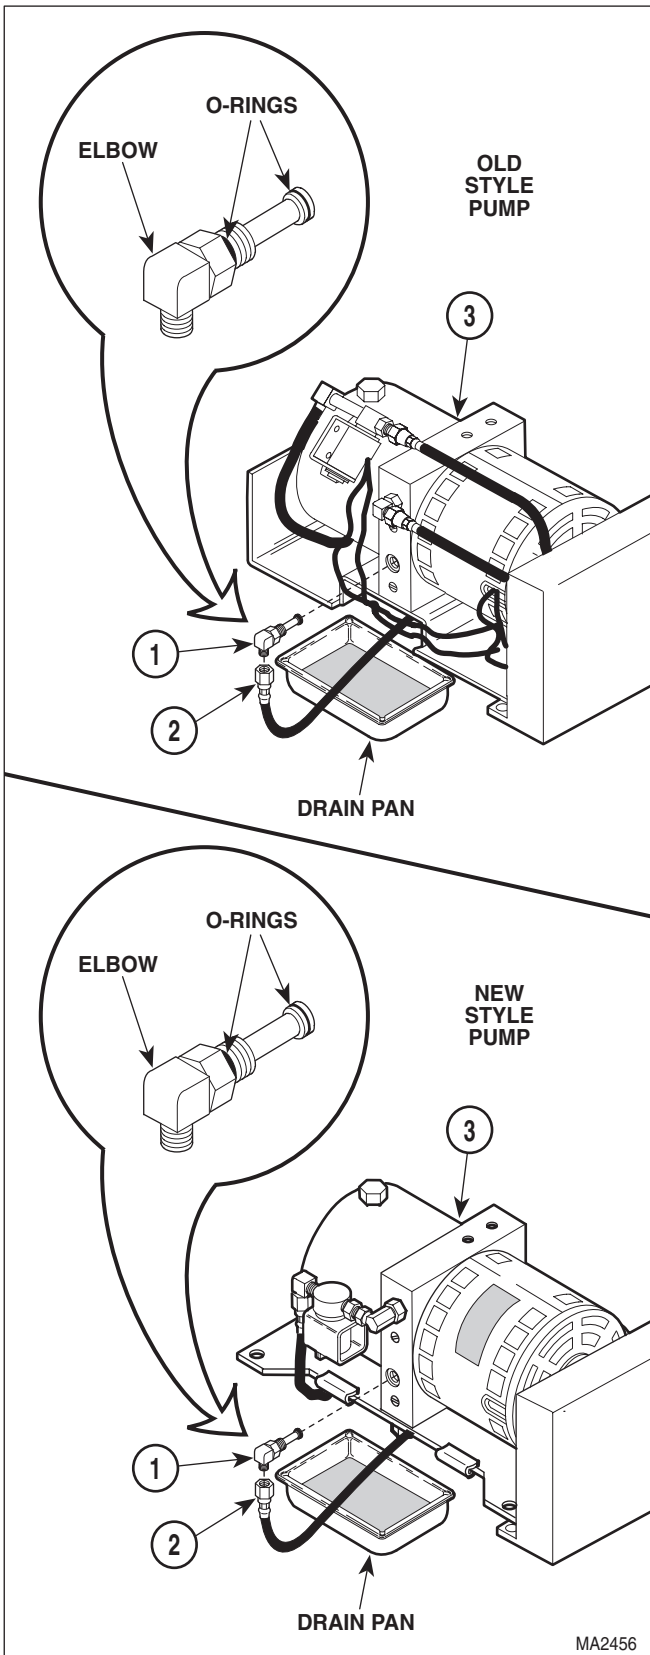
Up Functions Shuttle Valve Removal / Installation
